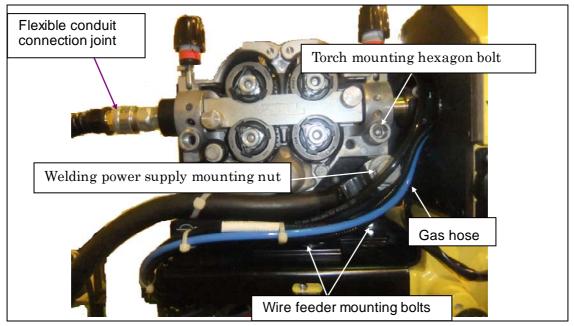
(a) Replacing the wire feeder Auto drive 4R100 (1/3)
